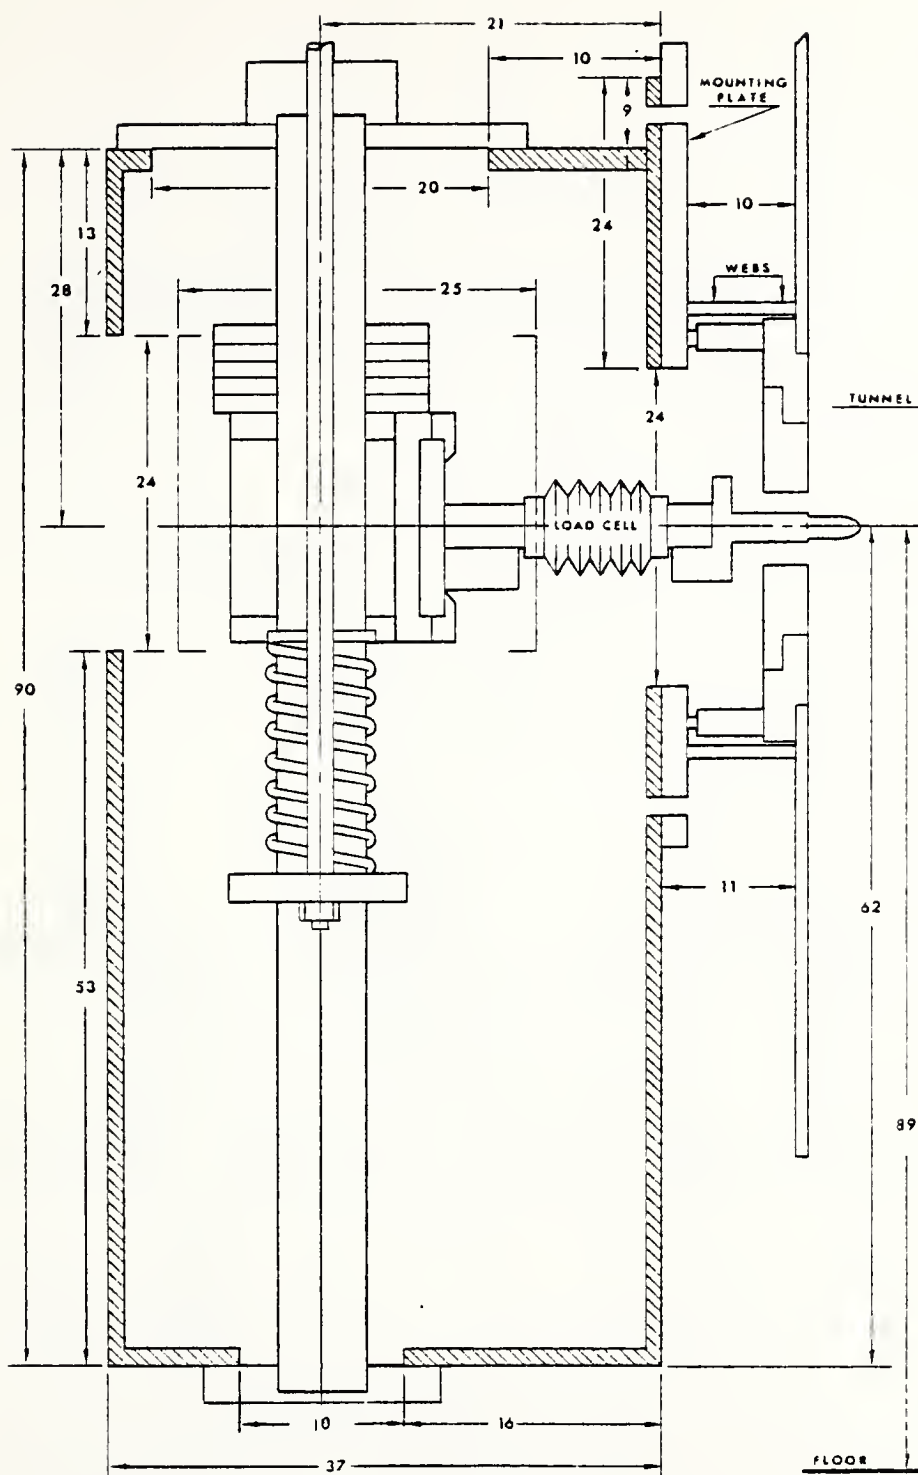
Side view of a cylinder-support mount and housings. (Dimensions in cm).
